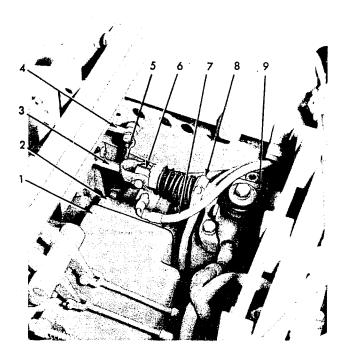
Range Selector Valve Installed (HD6EP Shown - HD7G Similar)
